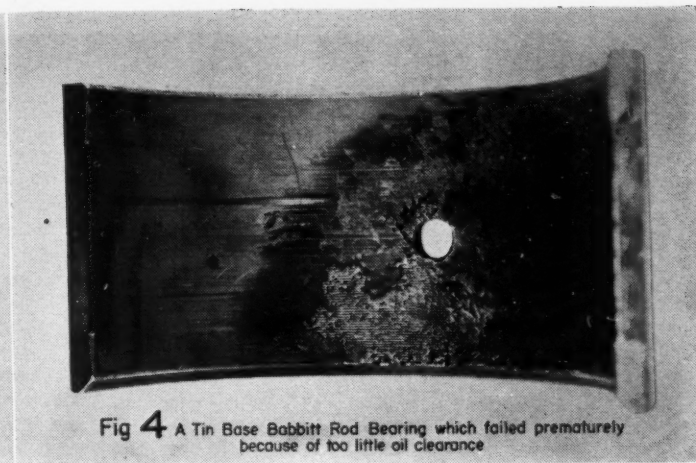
A Tin Base Babbitt Rod Bearing which failed prematurely because of too little oil clearance
